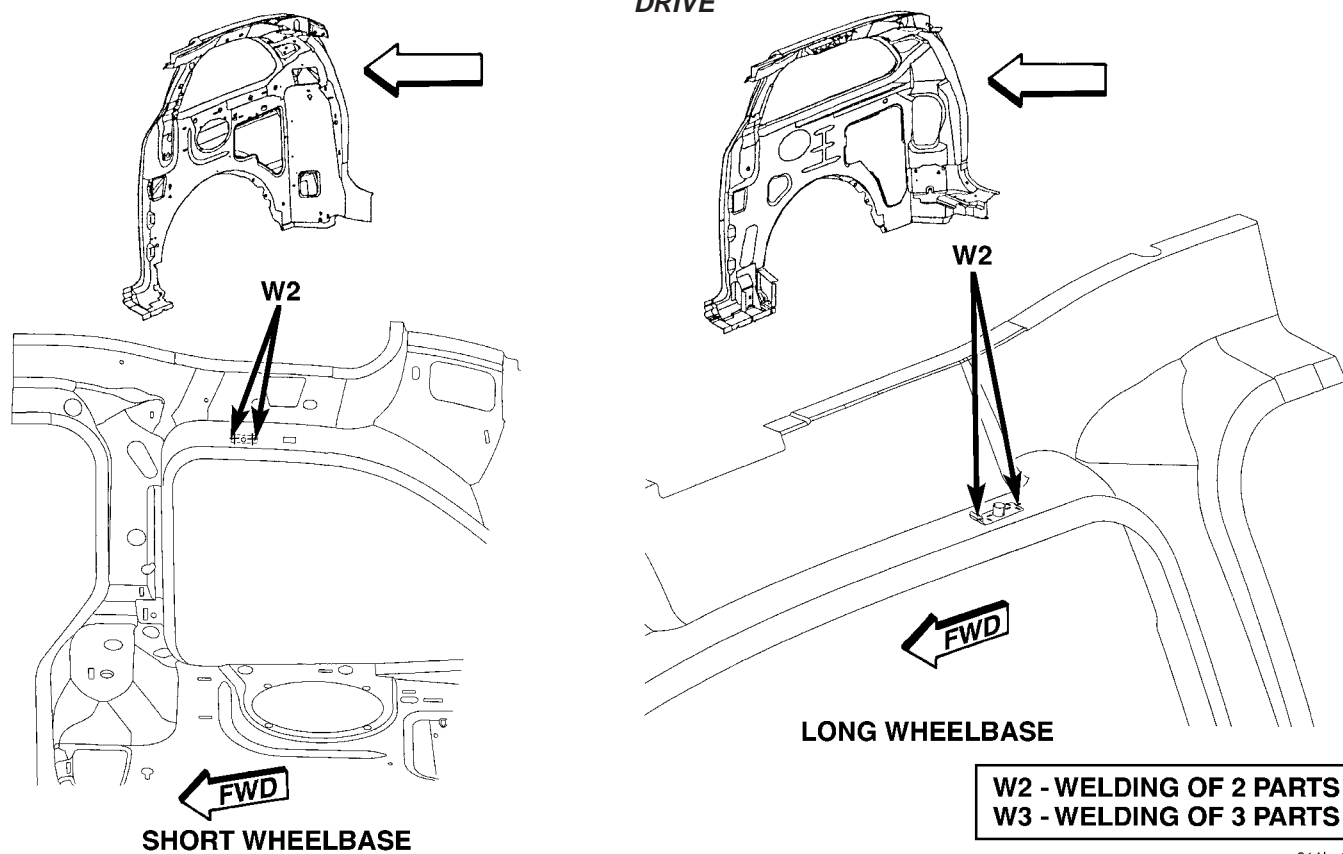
SIDE GLASS ANTENNA TAPPING PLATE AND INNER BODY SIDE APERTURE - RIGHT HAND DRIVE
